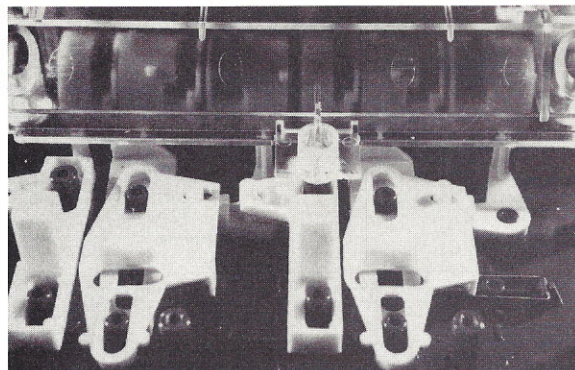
Joystick action of gear meshing. The large cylinder contains a multitude of gears. Moving the joystick causes a small pointer to move on the gear cylinder, allowing certain gears to mesh.
